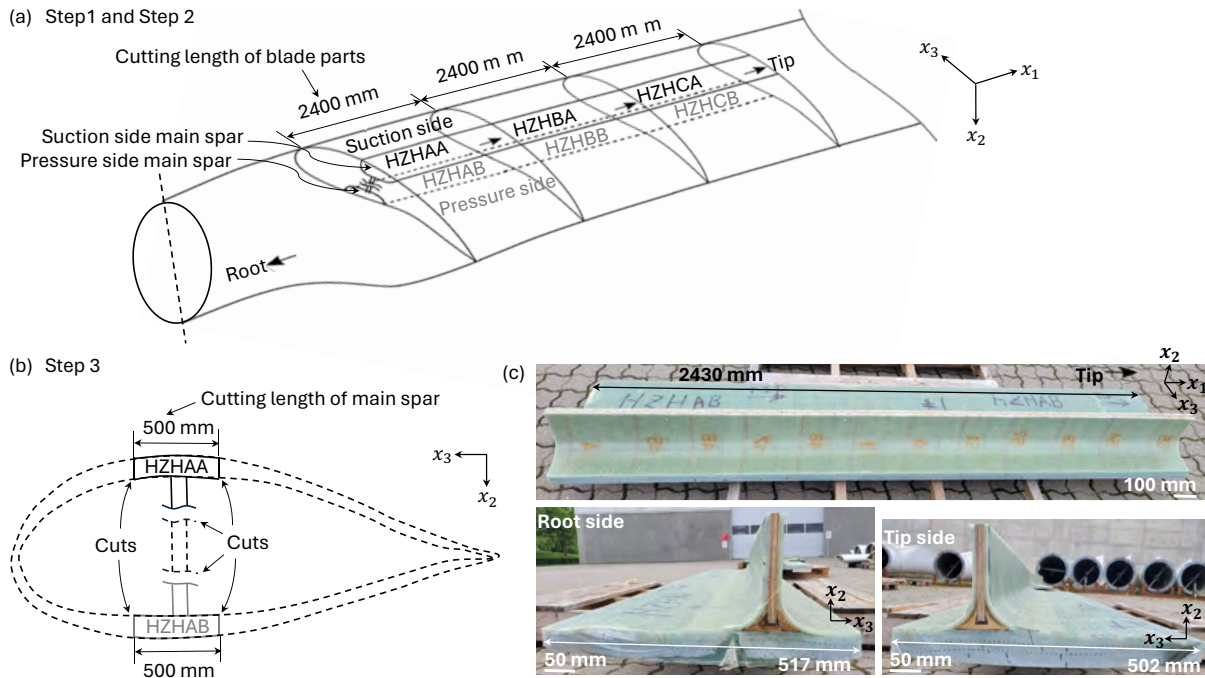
Cutting sketch of the decommissioned blade after in-field investigation. (a) Marked cutting dimensions and locations of three blade parts. (b) Marked cutting dimensions and locations of main spars. Dashed lines represent original blade cross section. (c) Images of cutout blade part HZHAB.
